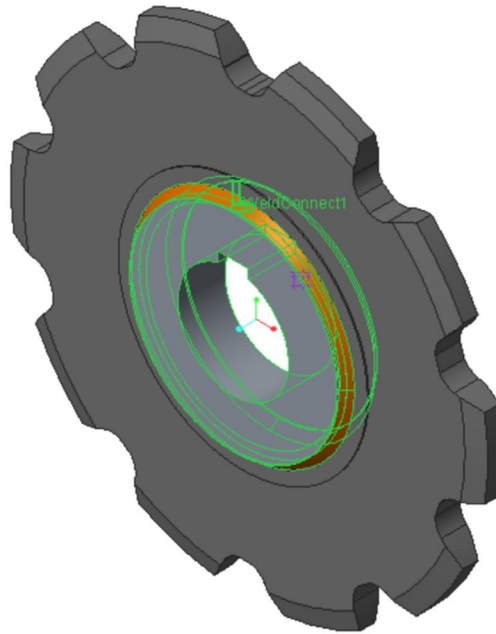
The sprocket was constrained with two fillet welds onto the shaft which was fixed.
